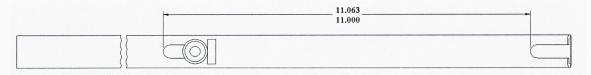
Keyway dimensions – typical for low and high beam assemblies
